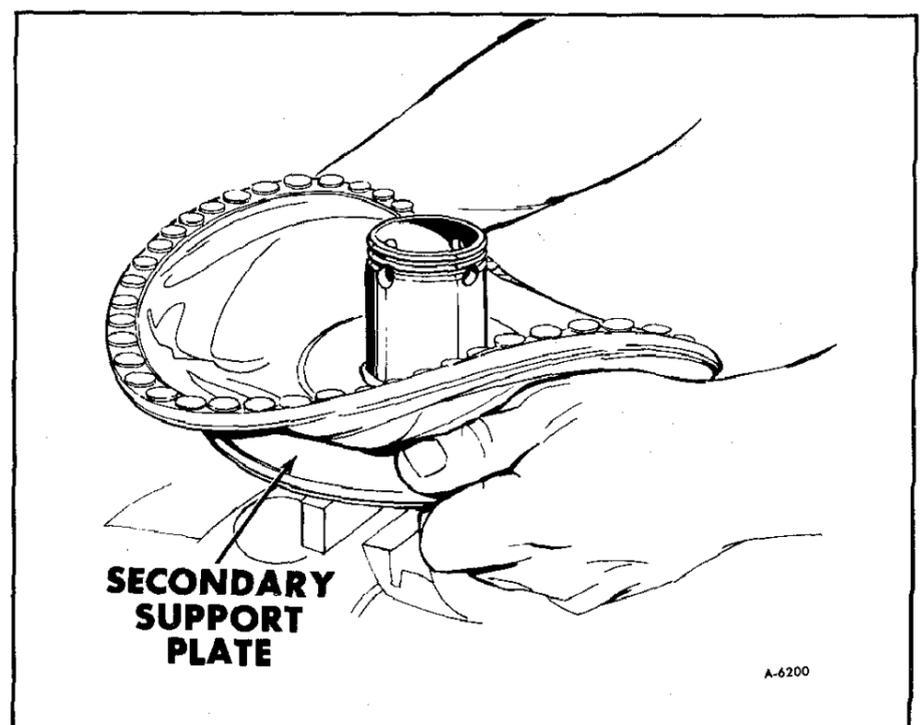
Locking or Unlocking Secondary Support Plate and Secondary Power Piston
